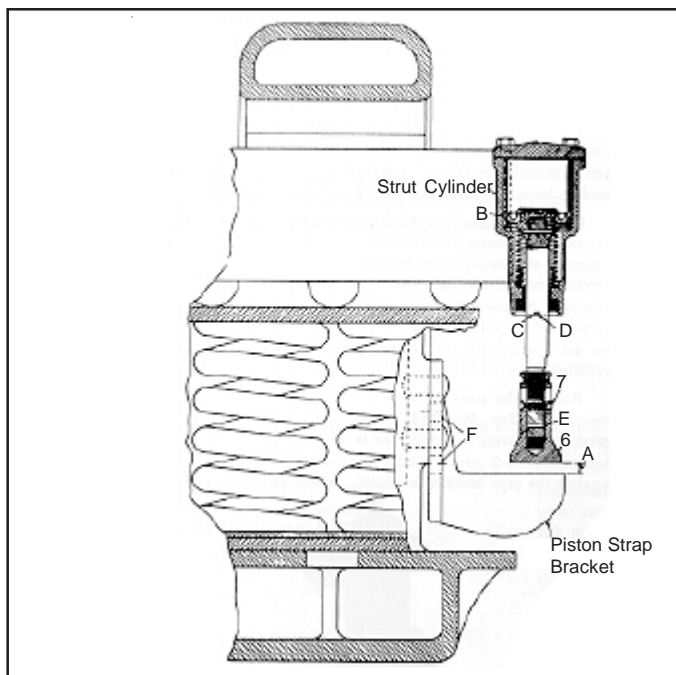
ABEL & A-1-B Strut Cylinder Adjustment
